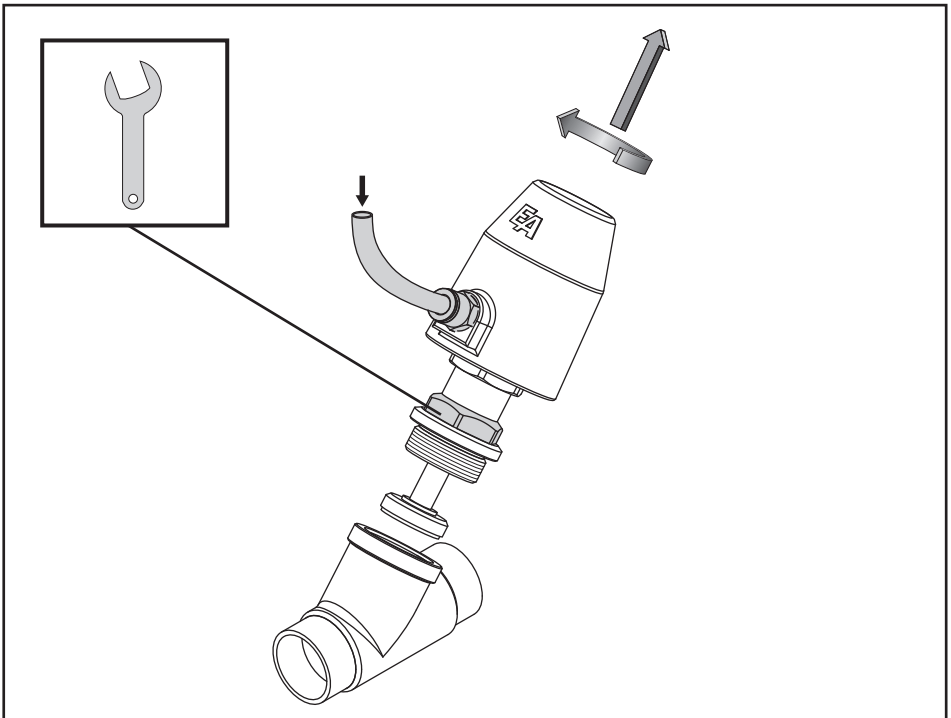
mounting / disassembly - welded connection, disassembly of the valve top
